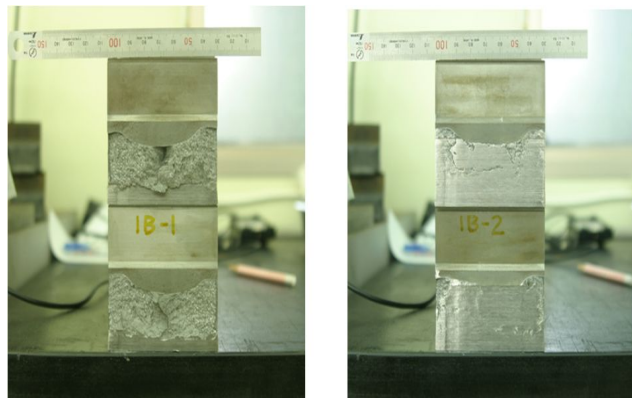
Fractured FCAW welded specimen with surface notch
